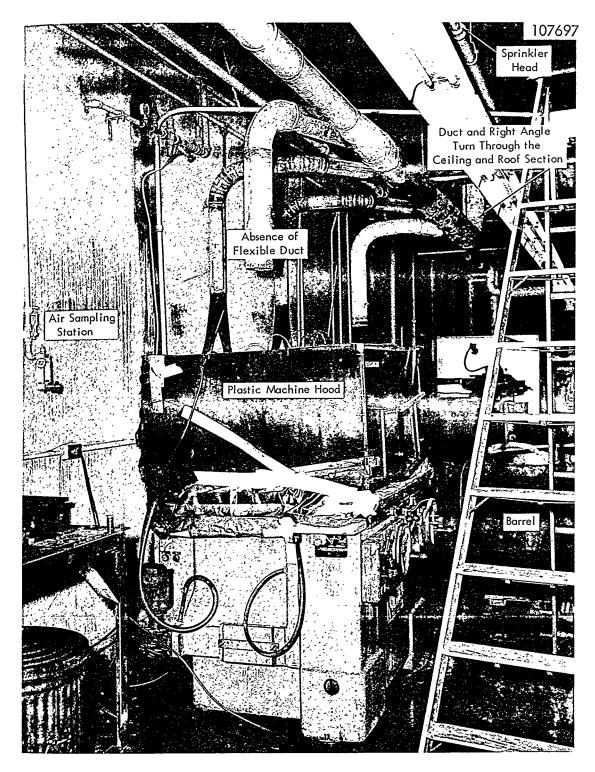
OVERALL VIEW OF HOODED GRINDER.
